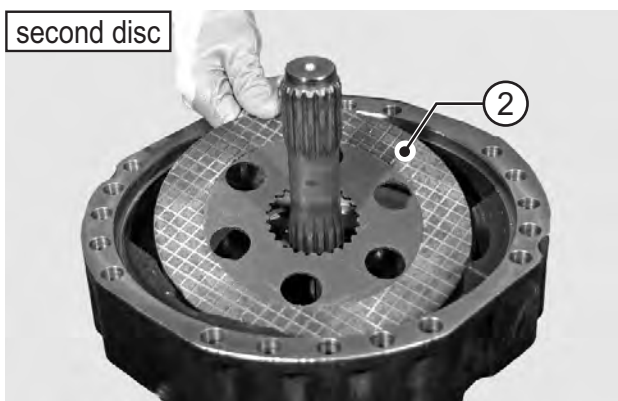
The second brake disc (2) to be inserted must be of friction material.
